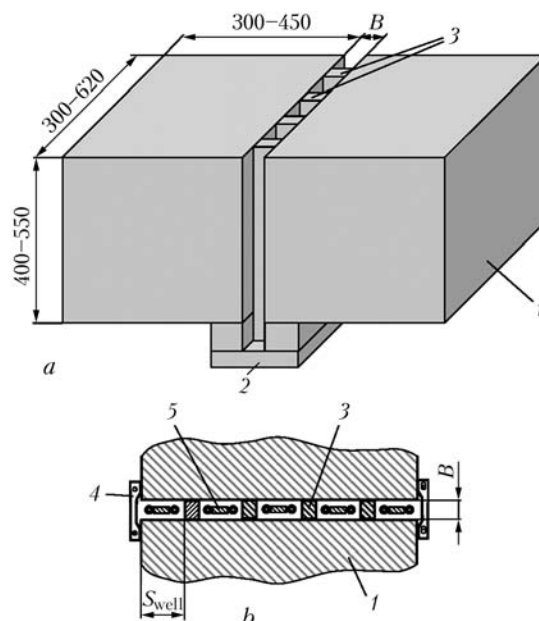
Scheme of assembly (*a*) and MESW (*b*) of pilot samples with longitudinal arrangement of consumable nozzles: 1 — parts being welded; 2 — input pocket; 3 — forming plates-spacers; 4 — water-cooled cover plate; 5 — consumable nozzle; *B* — width of welding gap; S_{well} — thickness of well metal
